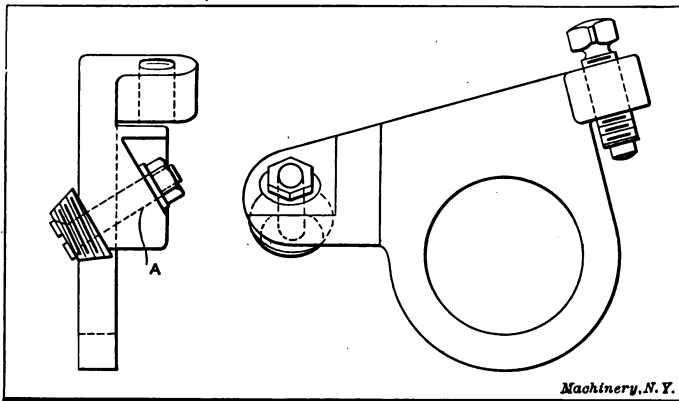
Cross-slide Holder for applying a Thread Roll to a Beveled Piece
